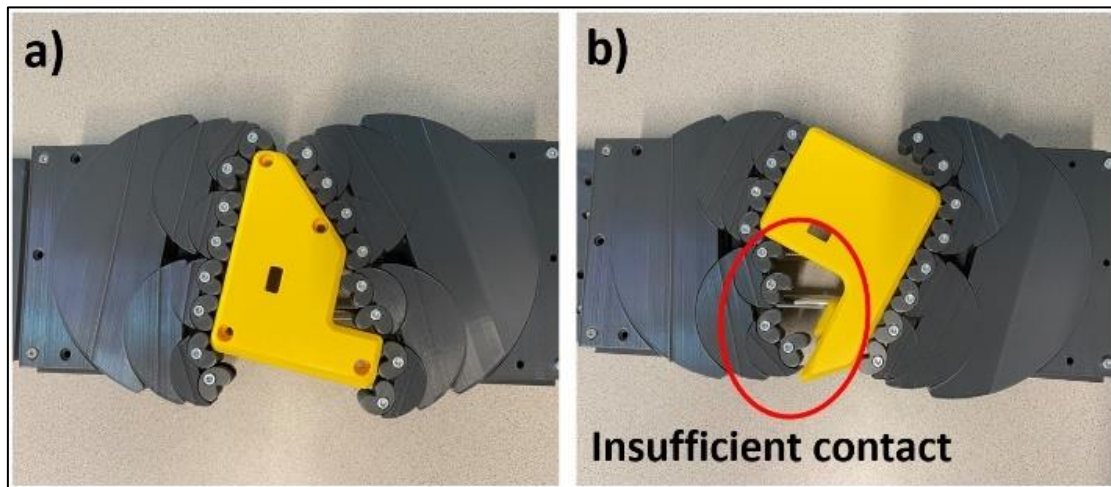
3D printed prototype clamping irregular shaped objects. a) Demonstrates a good grasp of the part and b) shows an insufficient contact due to the workpiece geometry
